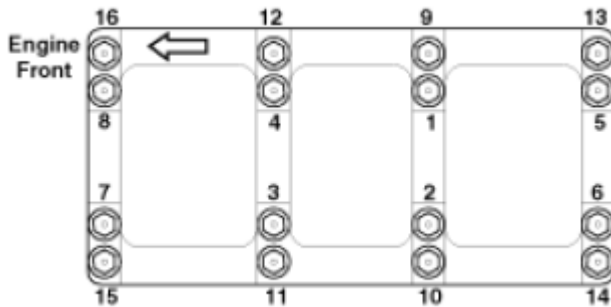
Identifying Main Bearing Cap Bolt Tighten Sequence
